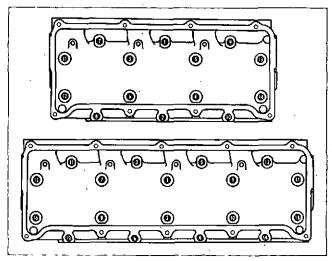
Cylinder head tightening sequence — V6 & V8
